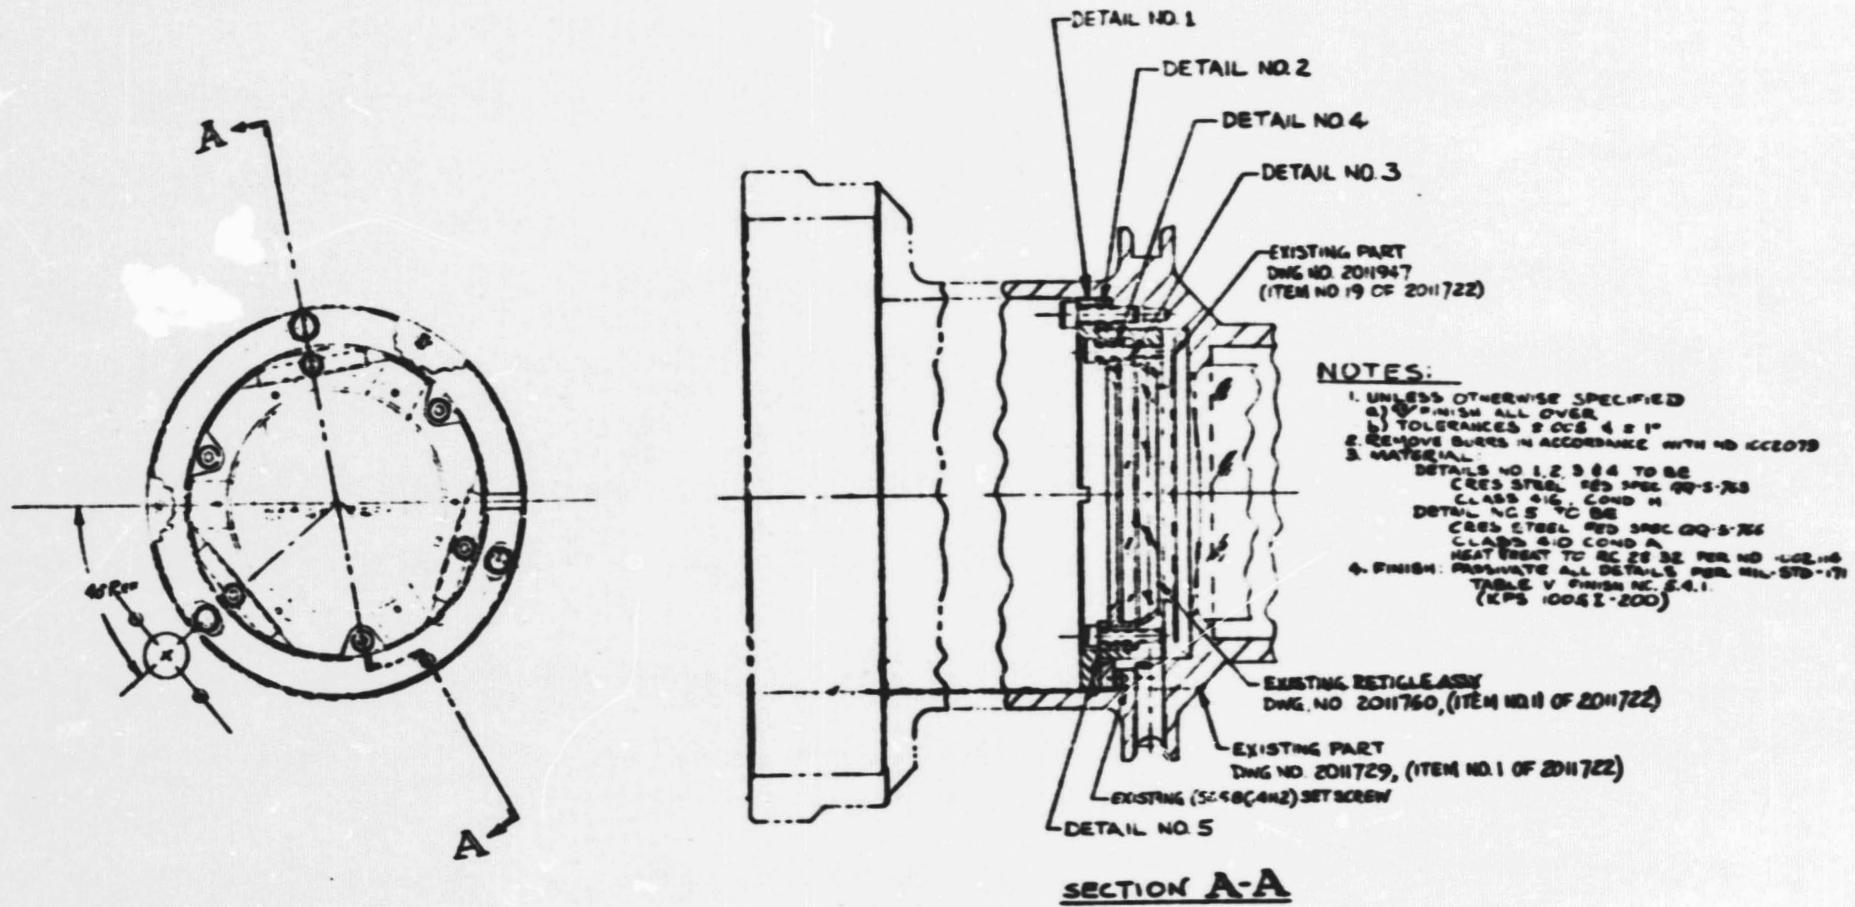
Adjustable Reticle Assembly - SCT (Sheet 1 of 3)
